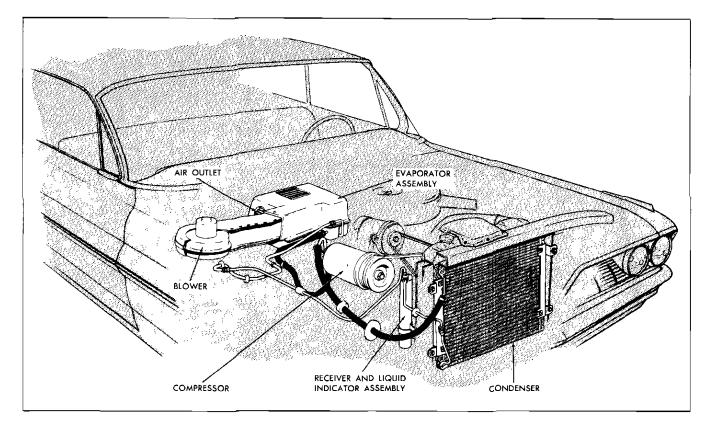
Location of Units in the Pontiac Cool Pack Conditioner System
